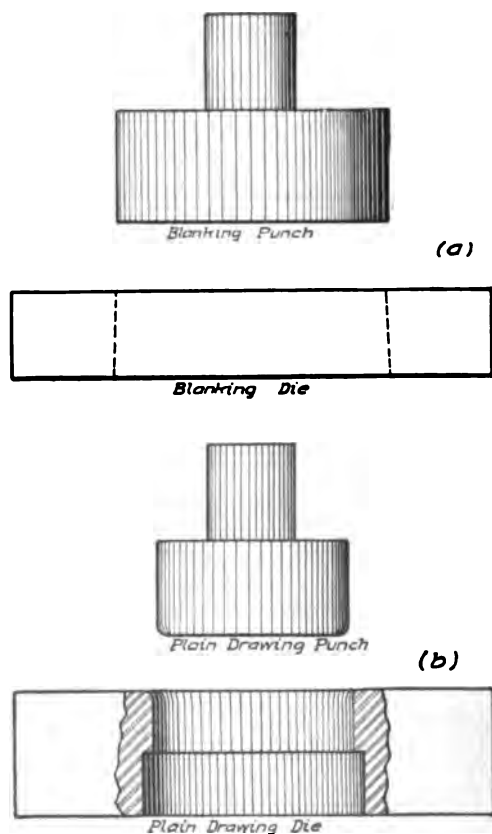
Blanking and Drawing Punch and Dies Shown Separately
